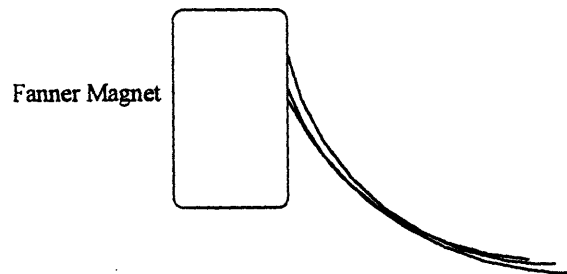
Fanner Magnet Spreading Sheets Breaking Suction Between the Sheets
